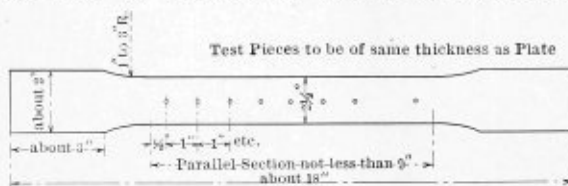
STANDARD TEST PIECE FOR BOILER PLATE.
